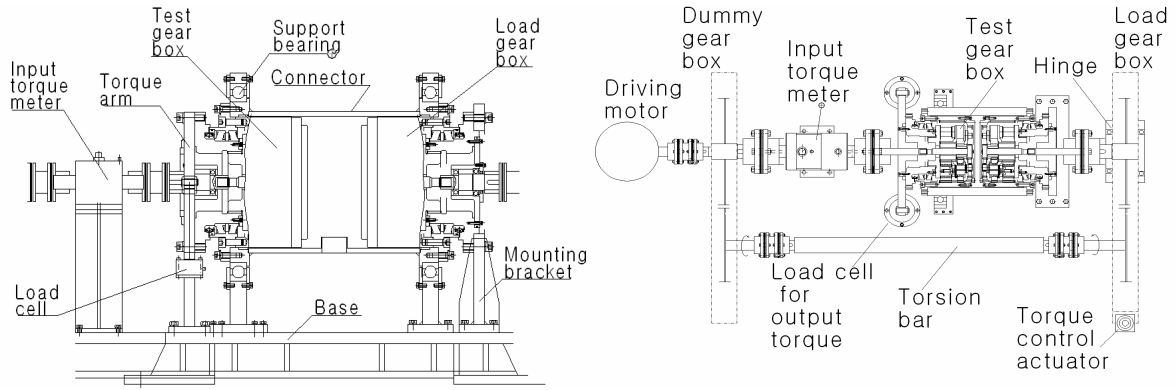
Newly developed torque measurement system of mechanical feedback type test mechanism for planetary gear box
